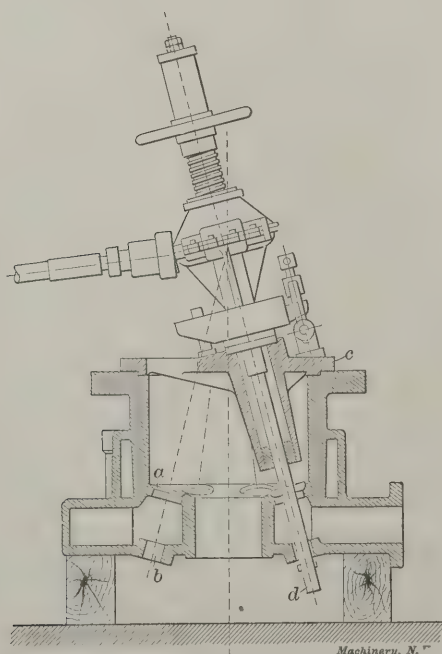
In Use in a Jig, Boring and Milling Valve Seats at an Angle.
